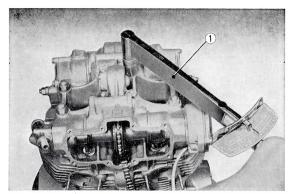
Tightening the 10 mm nuts by using a torque wrench
